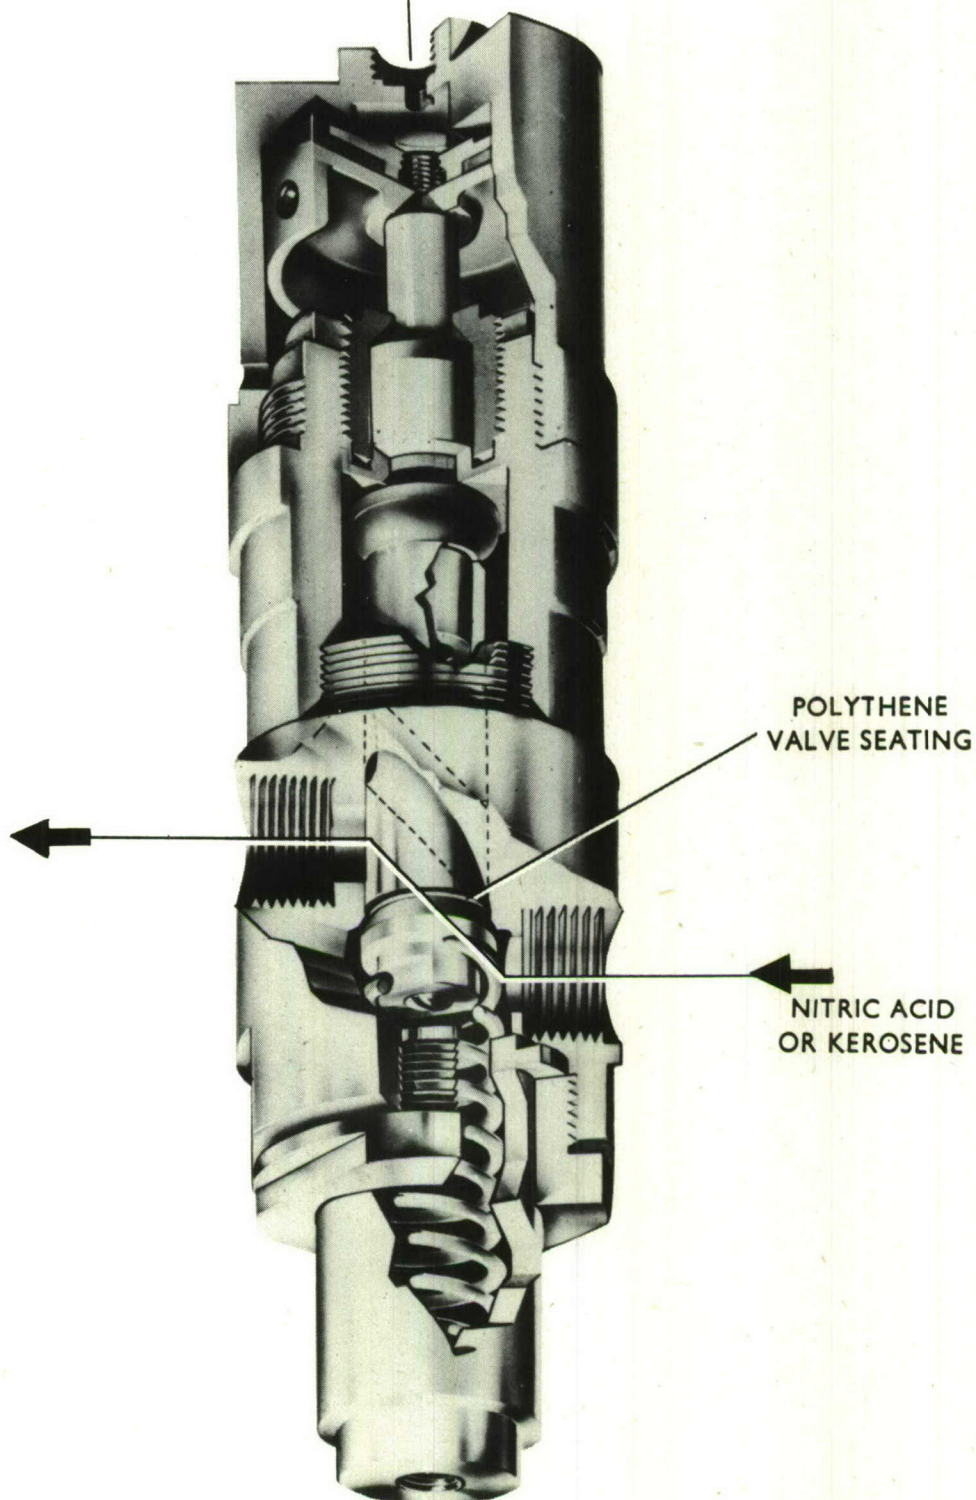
STAINLESS STEEL PNEUMATICALLY OR HYDRAULICALLY OPERATED VALVE USED IN TESTS OF INJECTOR HEAD No.4 & ONWARDS
